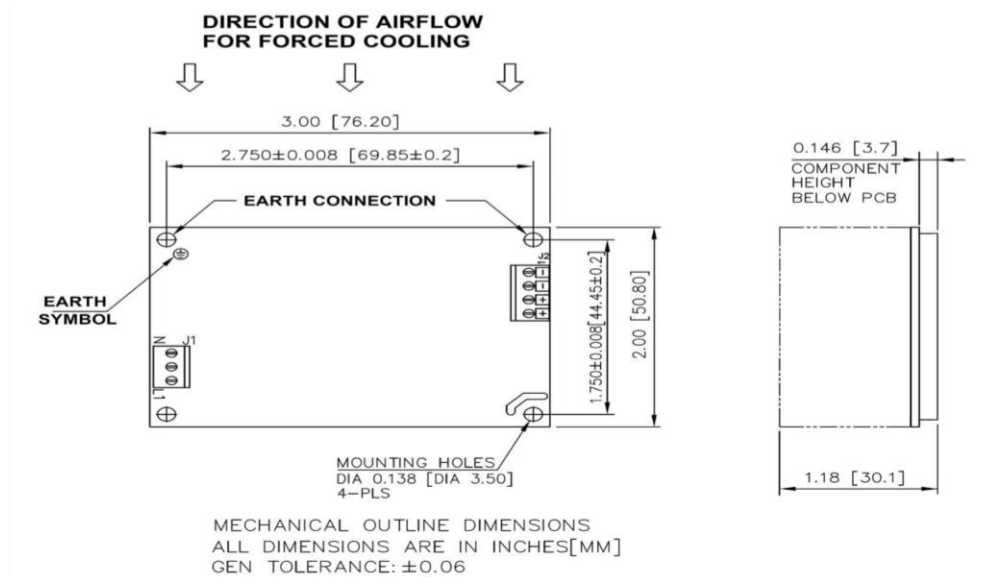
Mechanical Drawing - Screw Terminal (Option 1)
